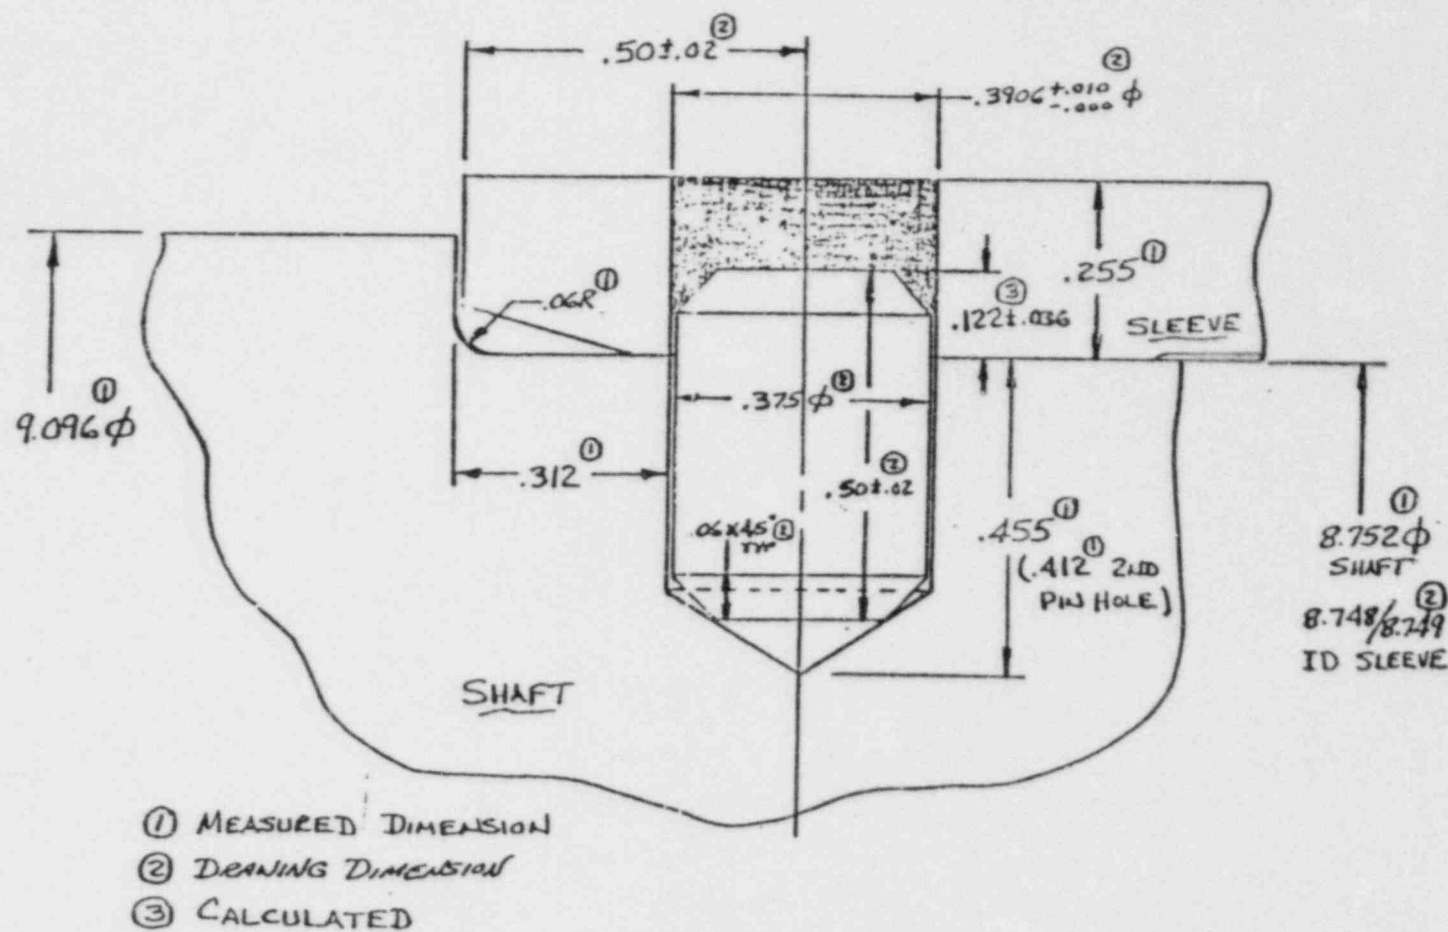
Pin Hole Geometry in Type B Shaft
